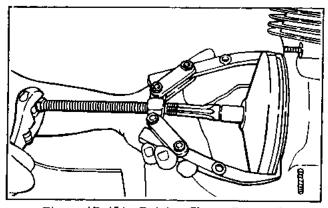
B-45A. Driving Flange Removal (1967 D Model)
